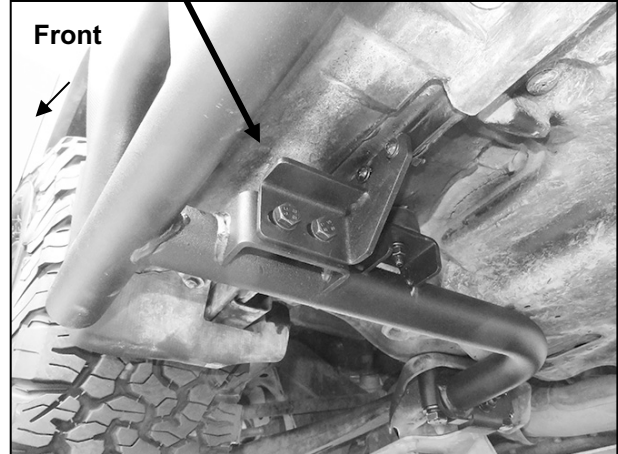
Drill 5/16" holes through pinch weld. Driver/left rear location pictured. Apply paint (not included) to all bare metal surfaces
